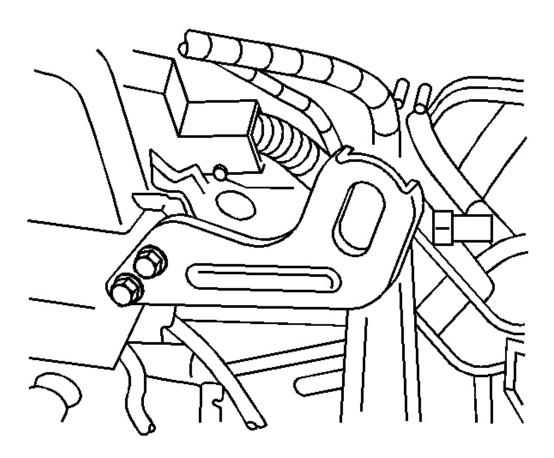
View Of Engine Lift Hook & Bolts Courtesy of GENERAL MOTORS CORP.
